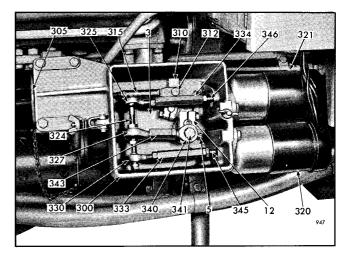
Throttle Control Linkage Arrangement (Former 62806RD Model)
